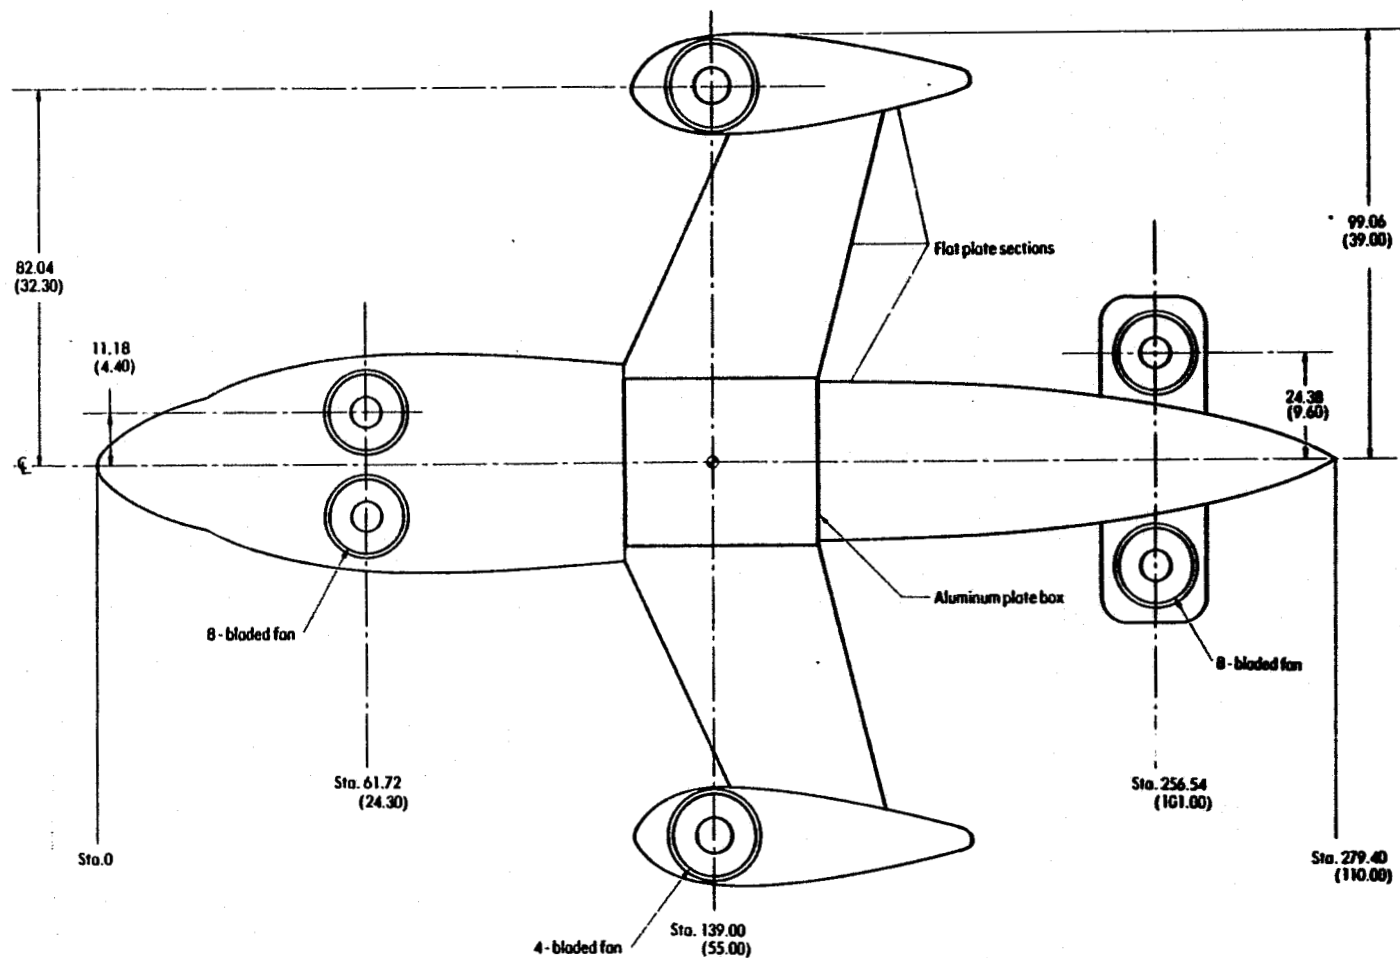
Dimensions of plate model 1 showing fan arrangement. Flat sections are 0.318 (.125) and plate box 0.635 (.250) thick. All dimensions are in cm (in.).
